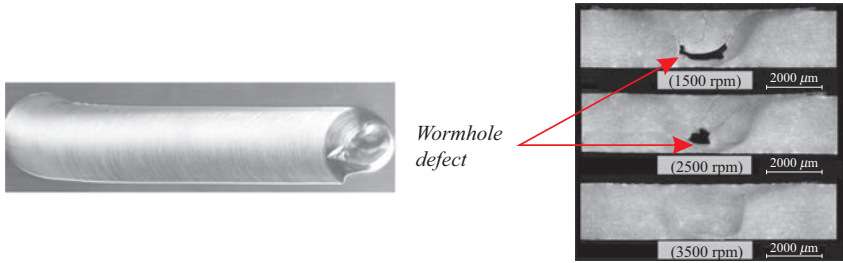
Wormholes appearing in the welding zone if the force on the tool or its rotational speed is too low [449]
